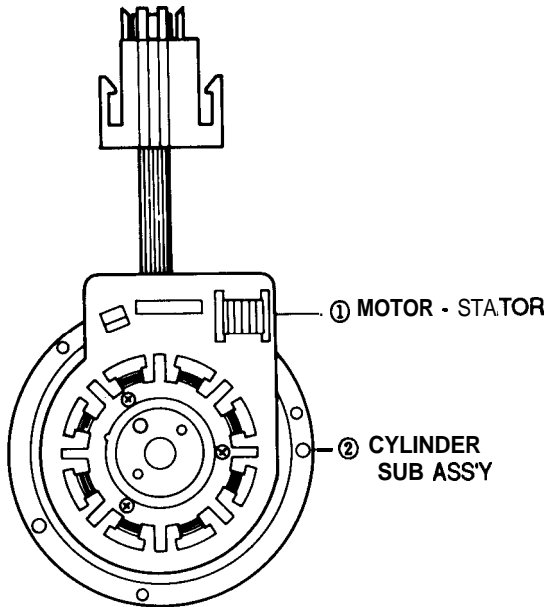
Assembly of Motor Stator & Cylinder Sub Ass'y
